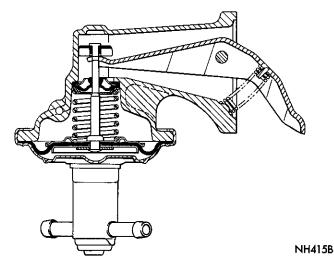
Fuel Pump Assembly (383, and 440 Cu. in. Engine)
